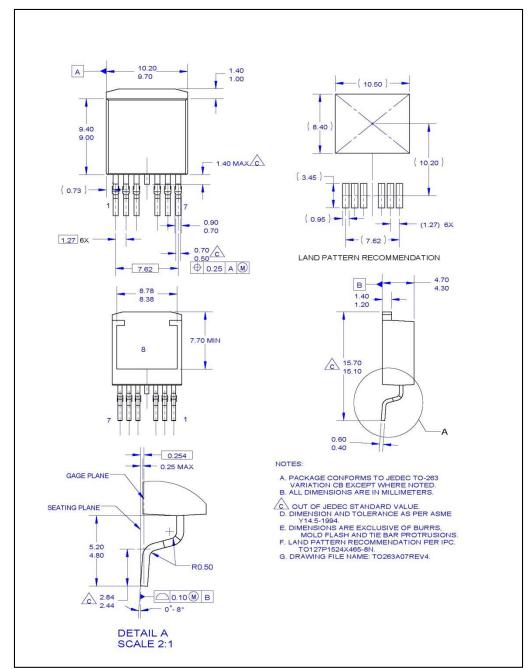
Packaging Outline and Dimensions (TO263A07 Rev4)
